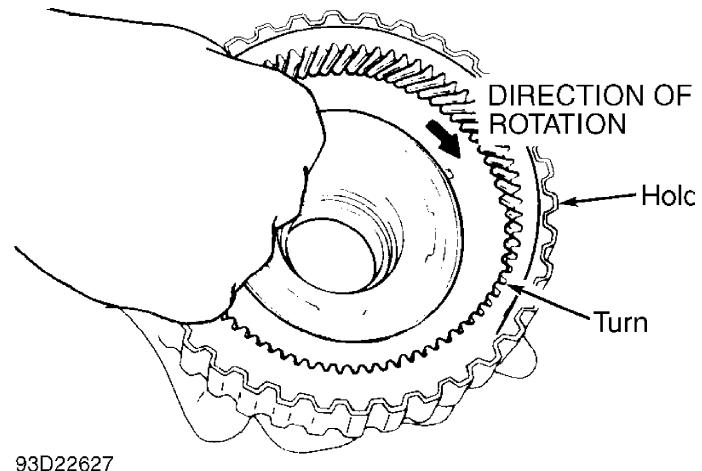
Checking Forward Clutch Hub Rotation Courtesy of Nissan Motor Co., U.S.A.
